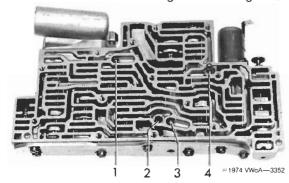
Ball valves in valve body. Ball for direct and reverse clutch valve is at 1, ball for 1st gear valve is at 2, ball for 1st and reverse brake band valve is at 3, and ball and spring for forward pressure relief valve is at 4.
